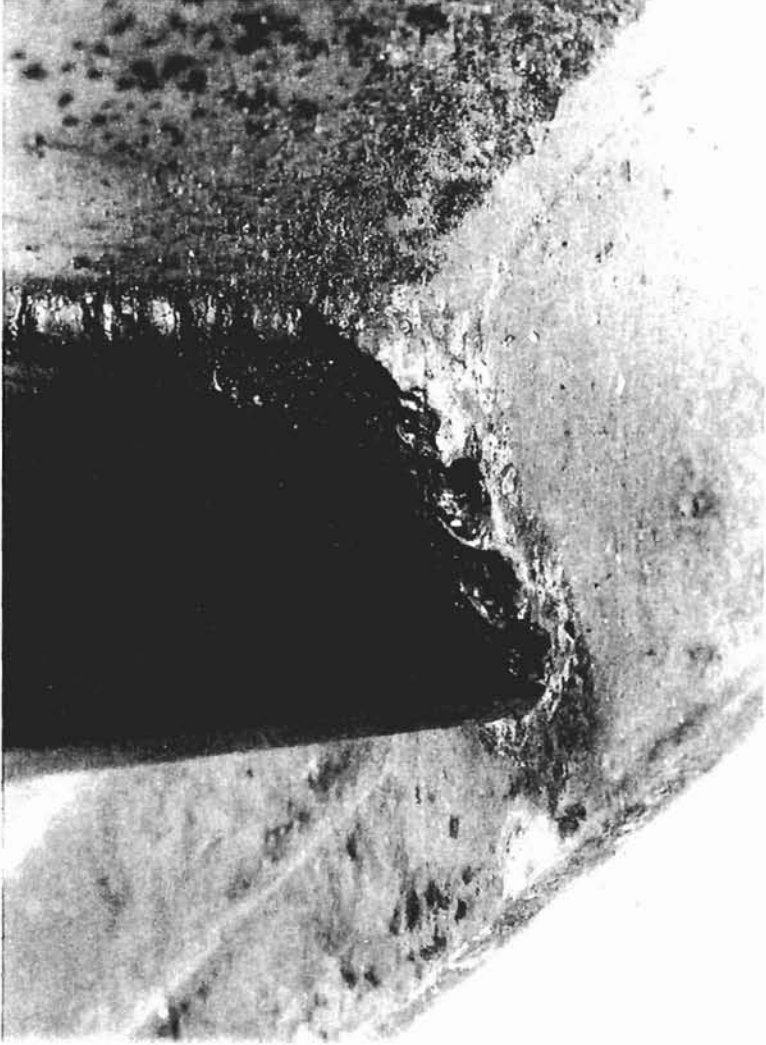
A Typical Welded Joint with Substandard Welds
